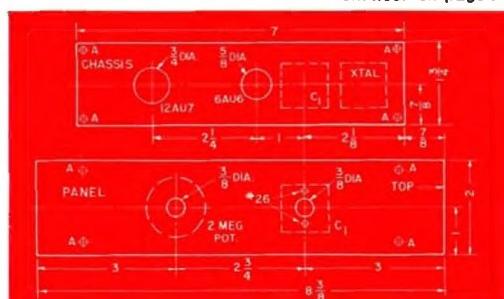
PANEL AND CHASSIS LAYOUT diagram for the CHANNEL SPOTTER. Holes marked "A" are No. 26 drill for corner posts on plate-and-post chassis. The crystal mounting will depend upon the type of holder.
